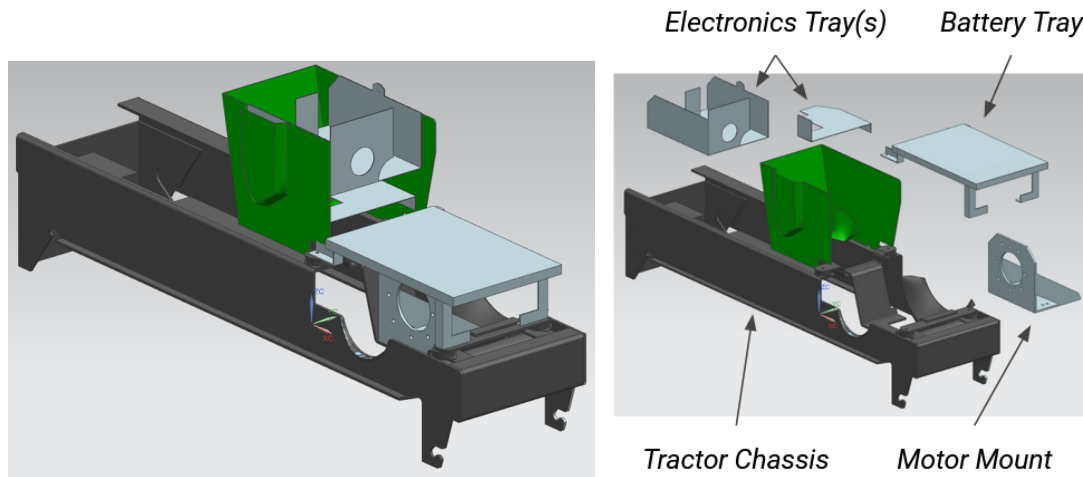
(a) Tractor Assembly, (b) Tractor Assembly Exploded View
